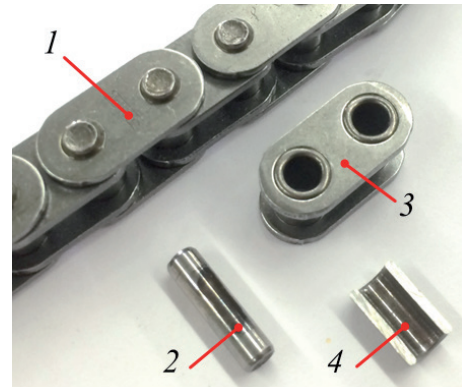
Chain joint components after disassembling (1: whole chain; 2: pin; 3: inner link; 4: opened bush)
